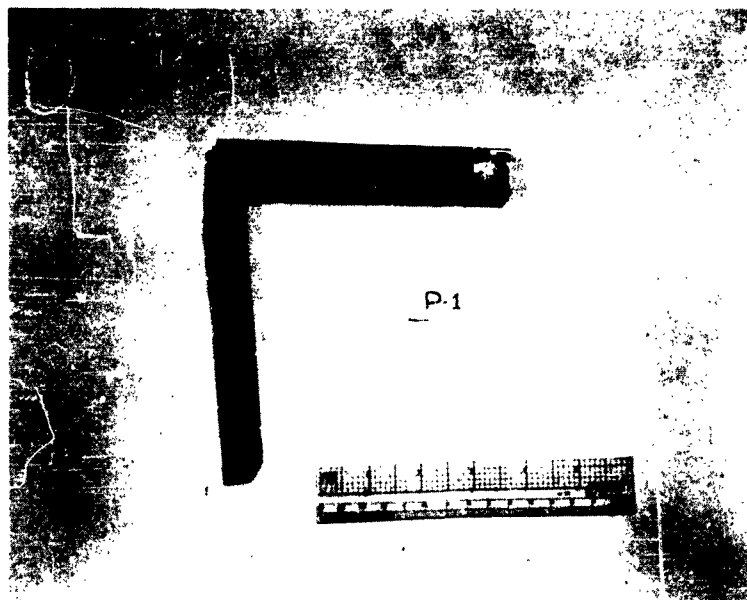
TYPE P JOINT AFTER FAILURE.
